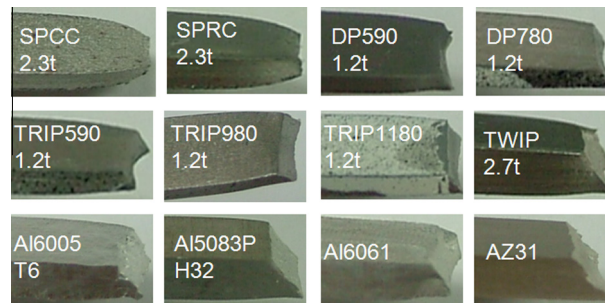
Two failure mechanisms: necking for SPCC and SPRC and ductile fracture for other metal sheets.
